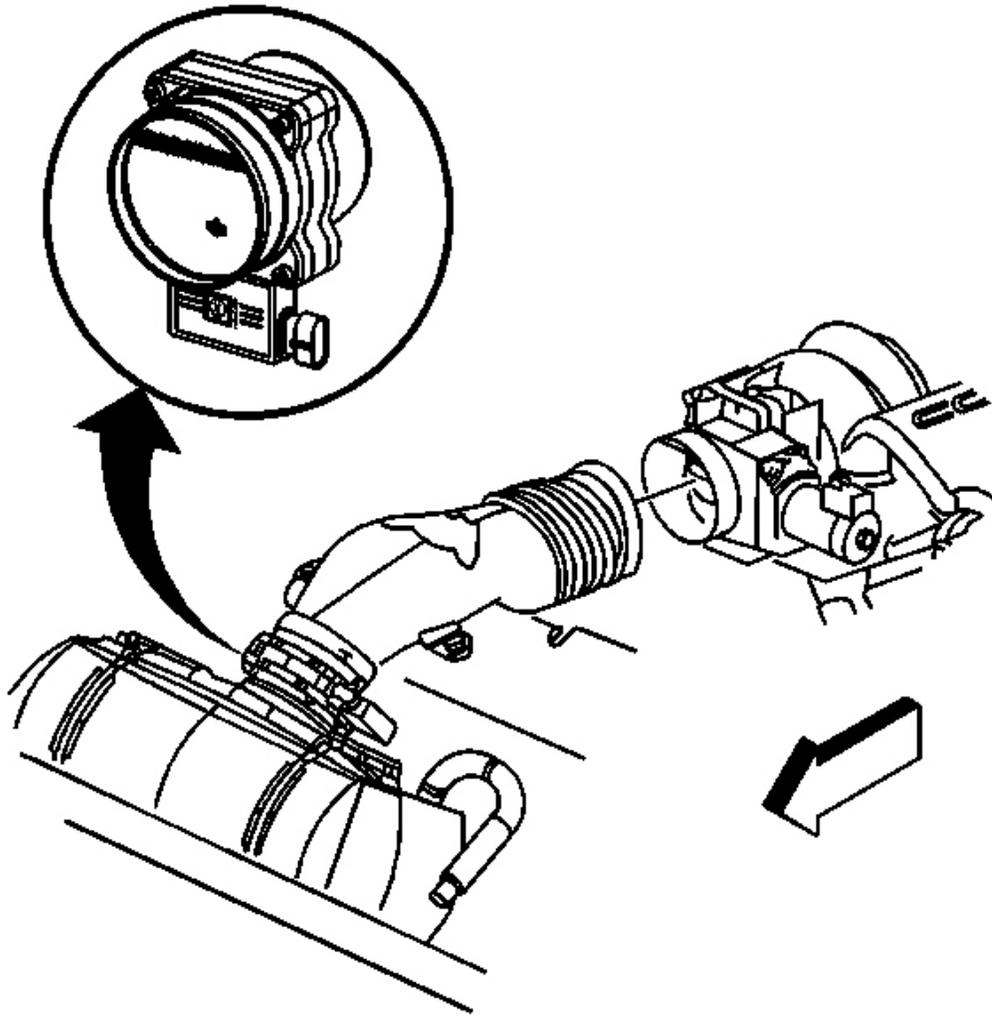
Air Intake Duct Clamp At Throttle Body
